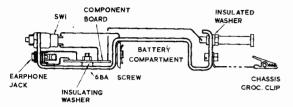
Layout of the major components, which also shows how the strip is bent.
